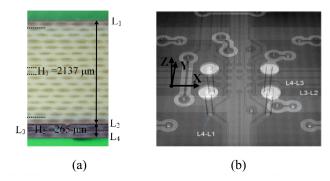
(a) Cross-section of the 4-layer stack, and (b) X-ray of the manufactured PCB.
